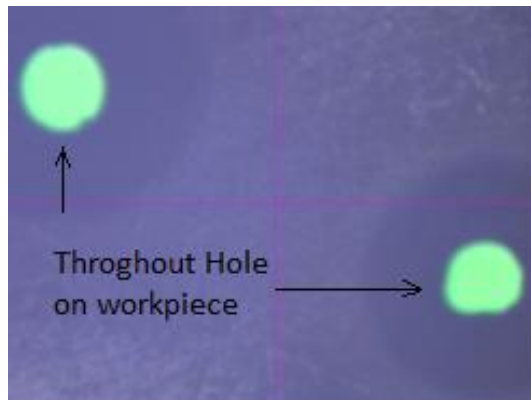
Micro hole on stainless steel (1.01 mm thickness), Nickel tool electrode, OCP= 3A
